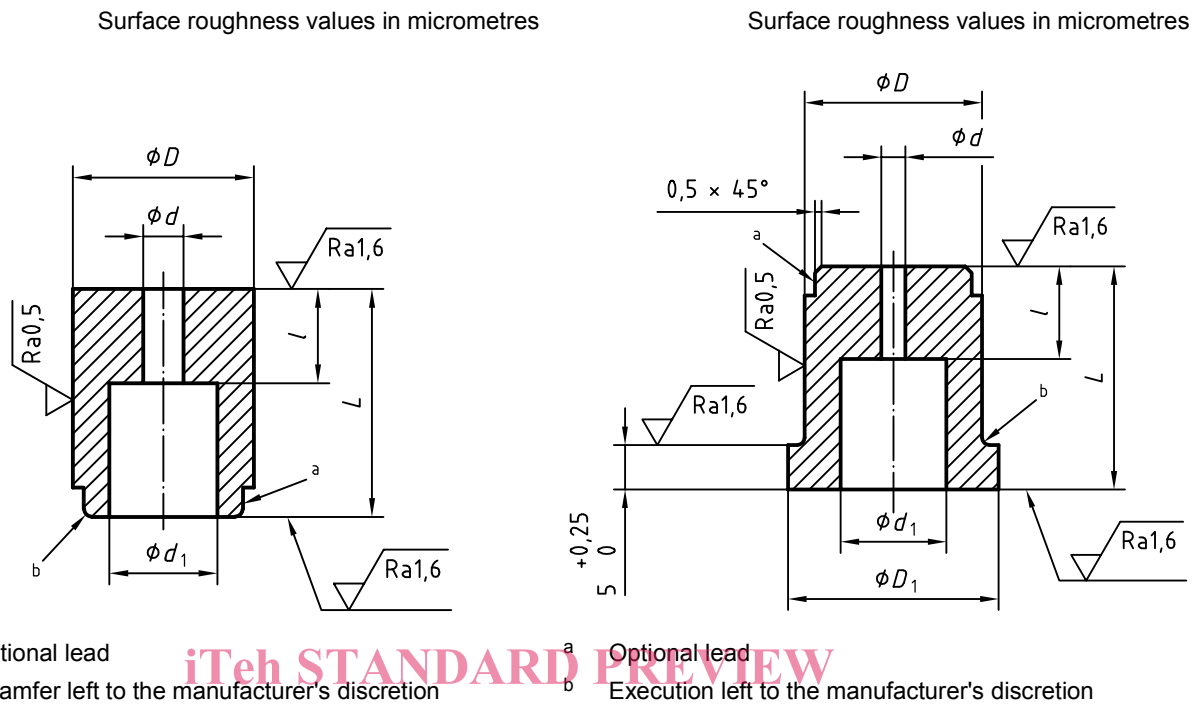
Type C — Blank headless matrix with shaped cutting shape
